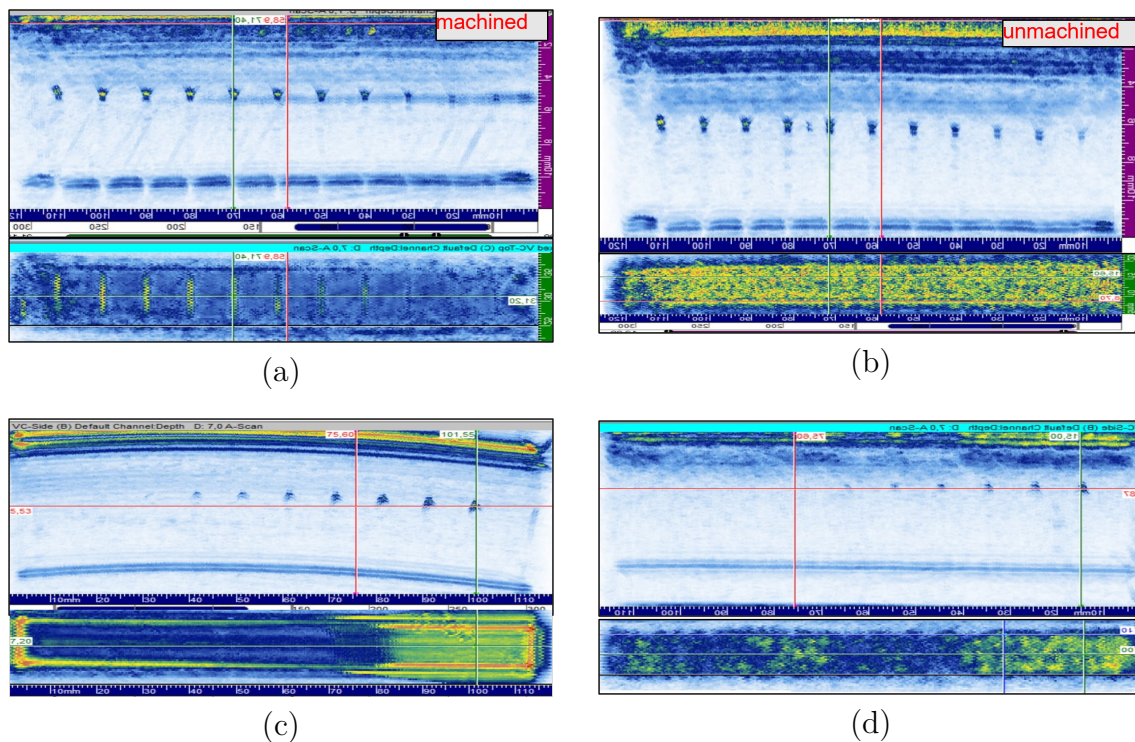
PAUT response from SDH and Internal Spheres Blocks. The B-scan (top window) and C-scan (bottom window) show defect detection: (a) SDH Block, machined surface, (b) SDH Block, unmachined surface, (c) Internal Spheres Block, machined surface, and (d) Internal Spheres Block, unmachined surface.
